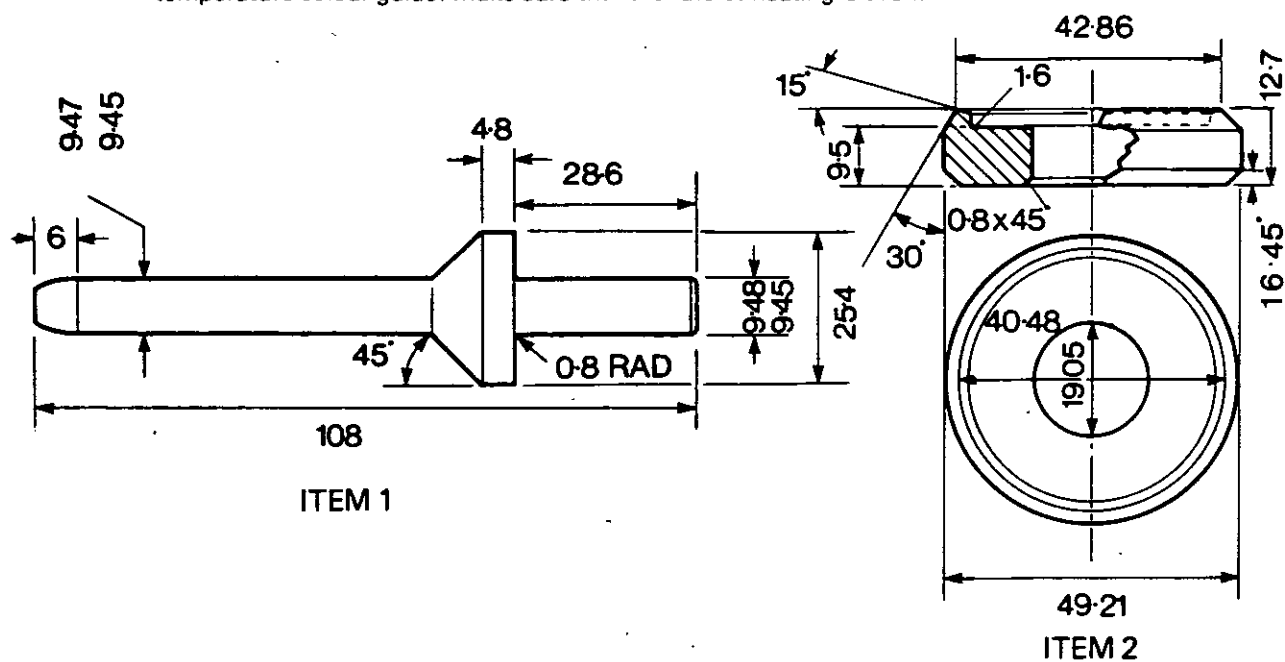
TOOL FOR INSTALLING VALVE SEAT INSERTS
